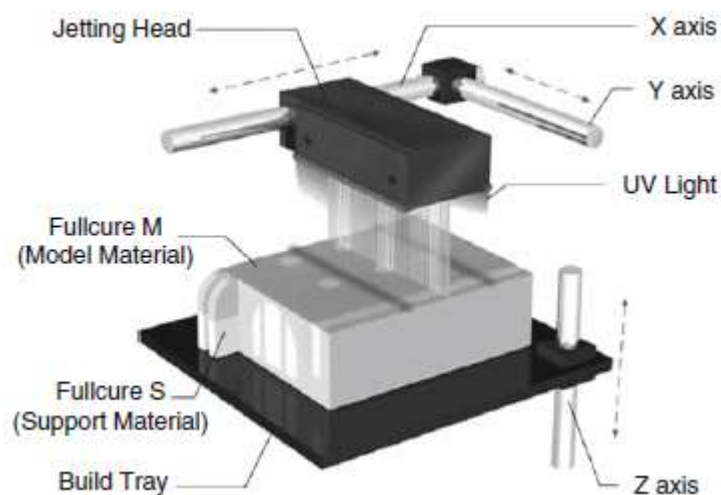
Printer technology used on an AM machine (photo courtesy of Object)
